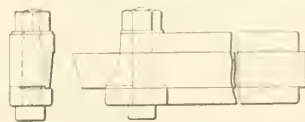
Cutting-off Tool-holder with Cutter held by Combination Clamp.
